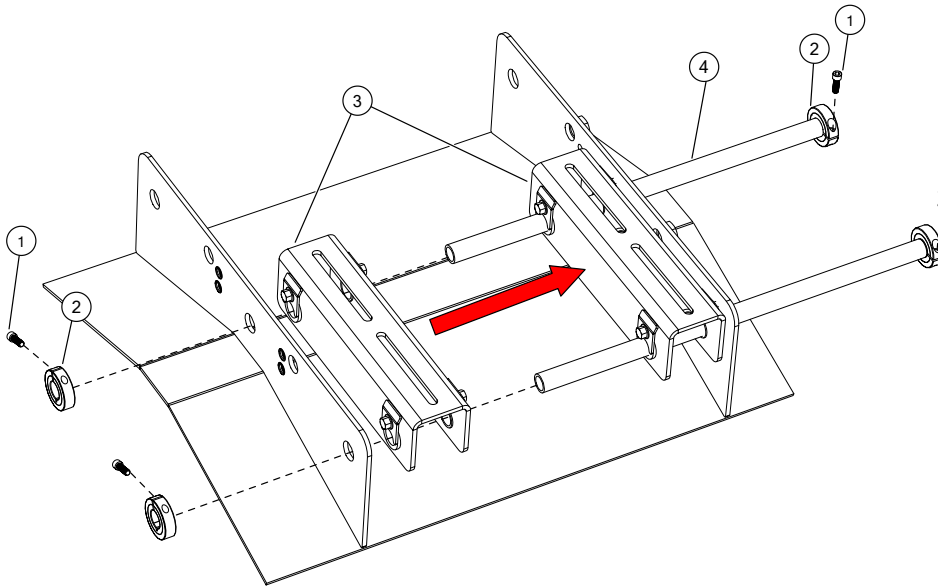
Step 1: Assemble the Motor Mounts (X2)
